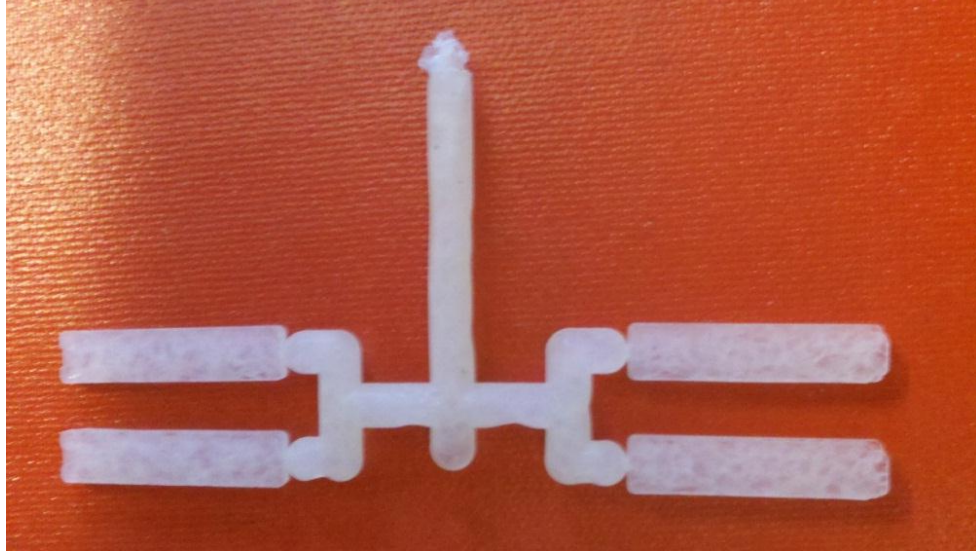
Digital camera image of HMW injection molded bend sample.
